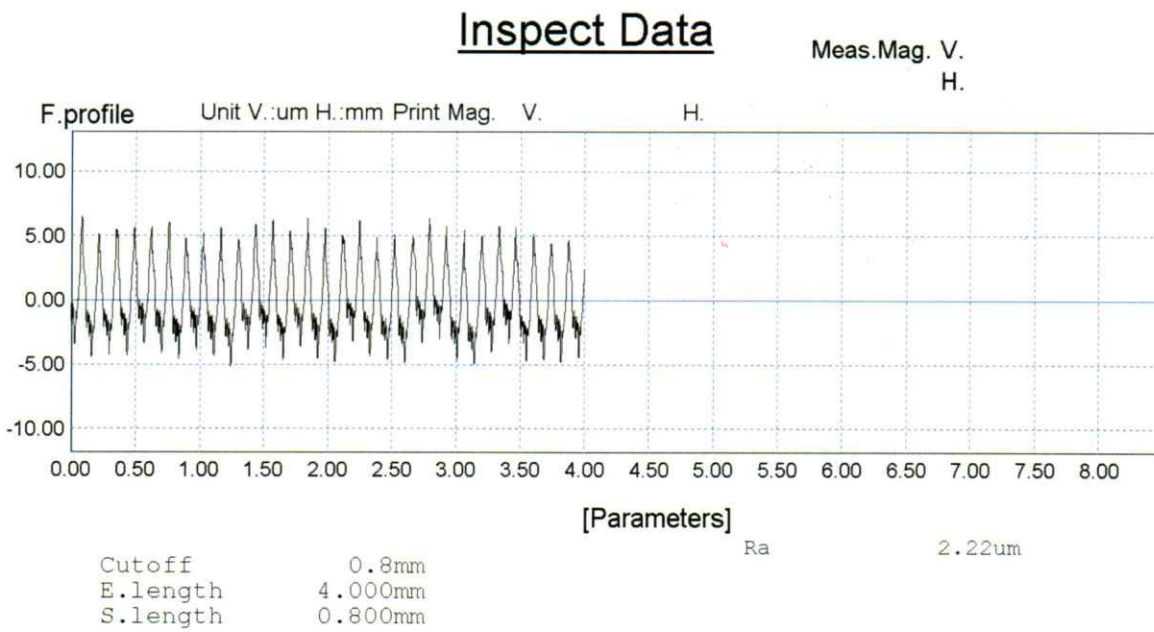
Measurement result of surface roughness of the workpiece
